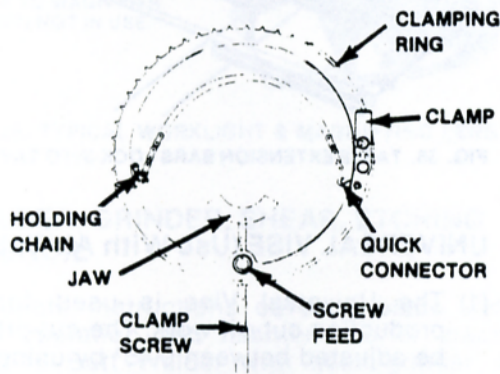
FIXTURE CLAMPS STOCK FOR CONTOUR SAWING.
